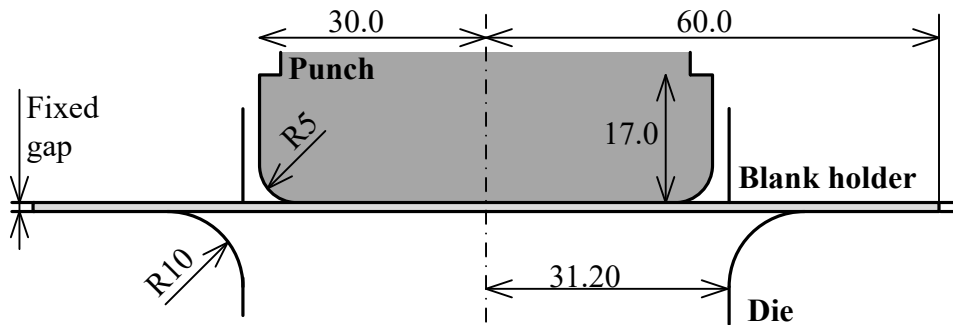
Schematic representation of the forming tools used in the cup drawing simulations (dimensions in mm) [2].
